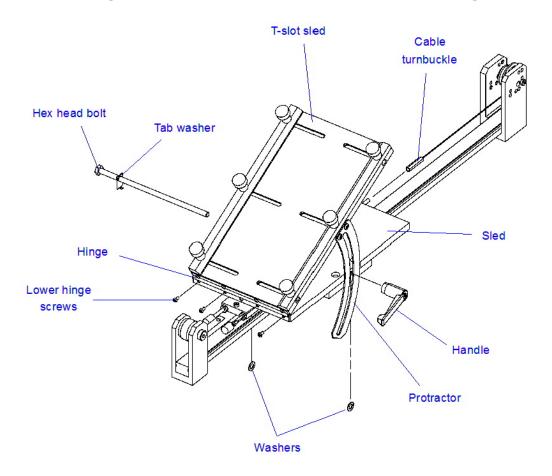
Reversing the T-slot Sled for the Variable Angle Fixture
